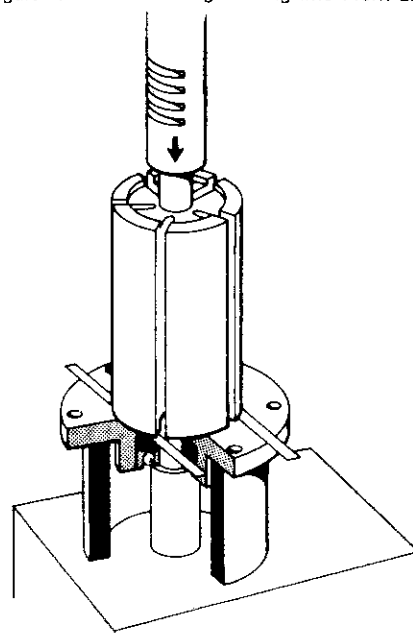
Pressing Rotor Assembly into Front Endplate
